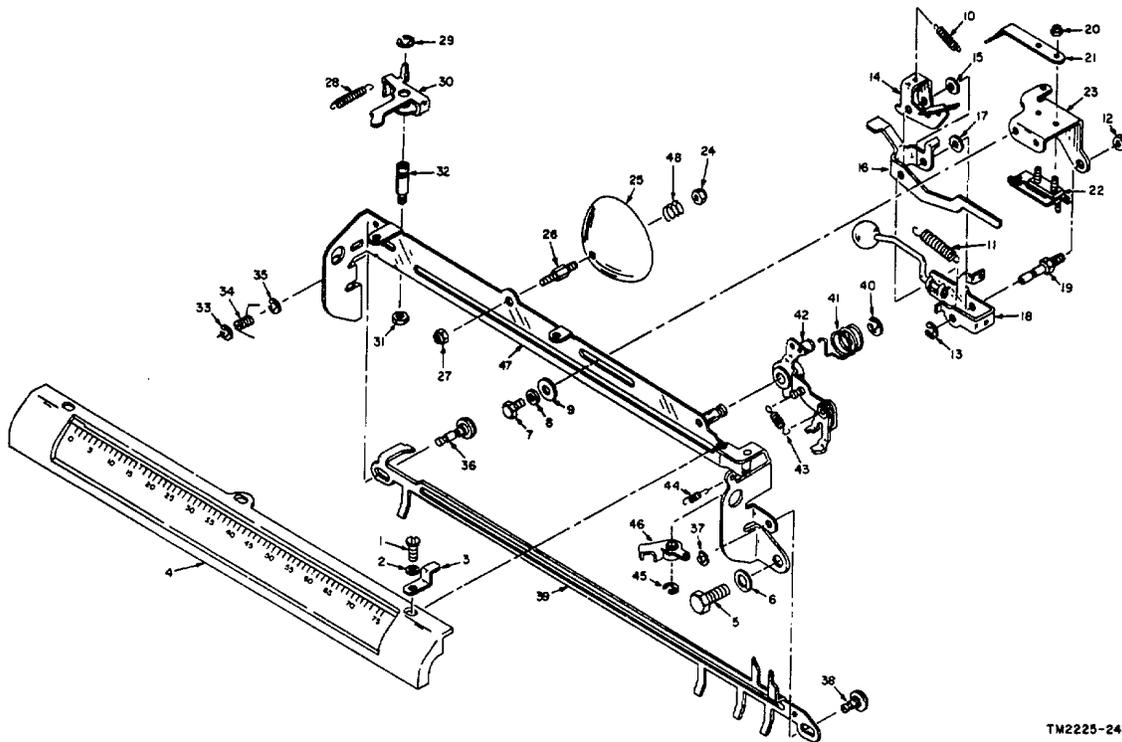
Indicator frame assembly, exploded view (TT-76/GGC).
